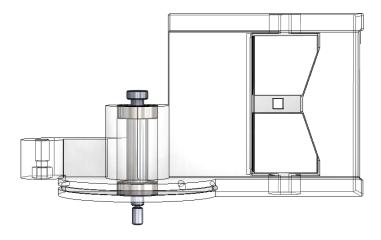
Side view showing the bolt and bearings inside the parallelogram arm. The pulling disk is also clear visible below. Around this disk a wire pulls the arm to exert a moment on the parallelogram.
